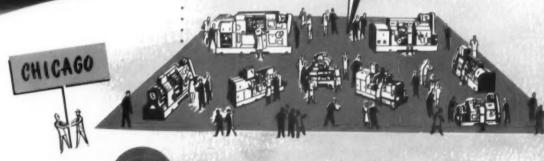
EXHIBITS DURING THE MACHINE TOOL SHOW. STOP IN. SEE THE WORLD'S
